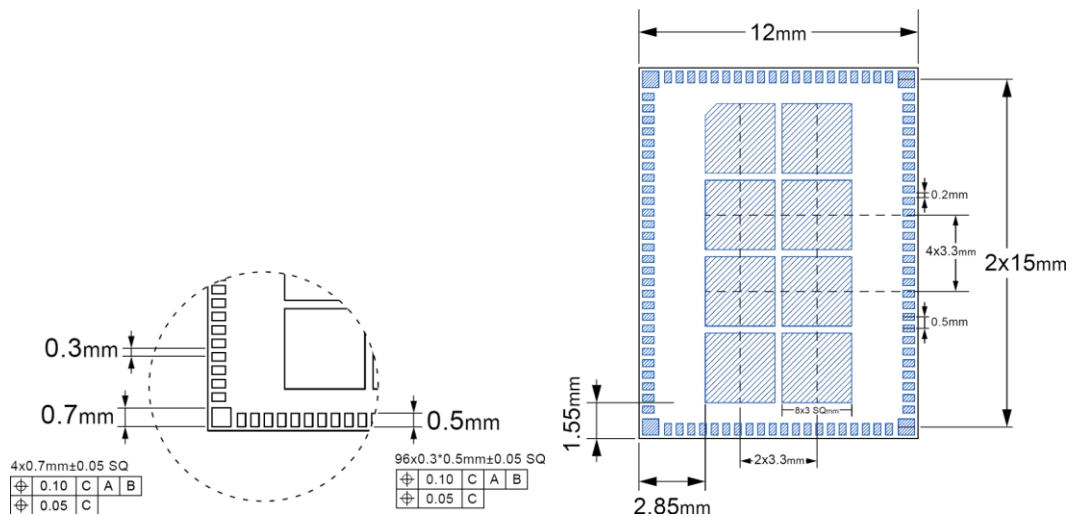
MQC2072 M.2 Soldered-down Type 1216 Module PCB Landing Pattern
